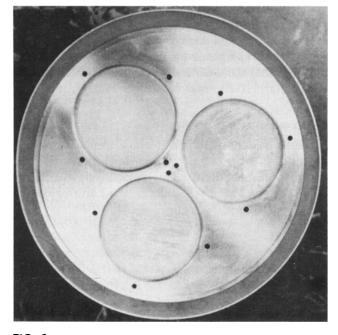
Probe crystal probably damaged by overtightening P-M tube mounting bolts or during removal of same. Third P-M tube was properly handled and resulted in no damage. Local intense cracking associated with other two tubes is typical of mechanical damage.
